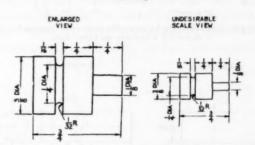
Draw small parts large enough to avoid crowding so that they may be easily read but not unnecessarily large as to waste space on the drawing.
